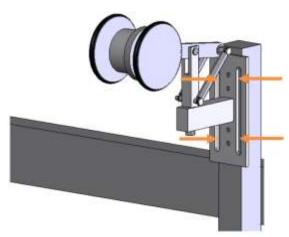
Attaching the incremental encoder to the conveyor belt (optional)
